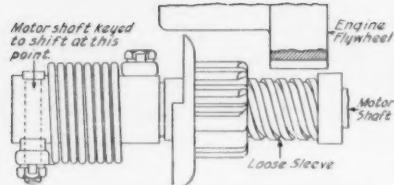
SPRING DRIVE SHIFT (INBOARD)
